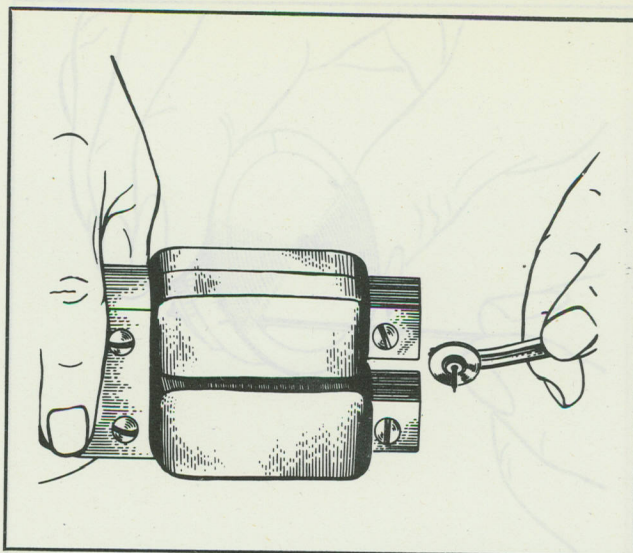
J—Demagnetizing Magnesyn Shaft Assembly With Demagnetizer, QE-4589-1
